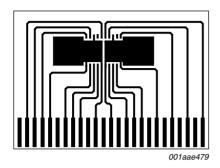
PCB used for thermal tests; heat sink area 200 mm²
